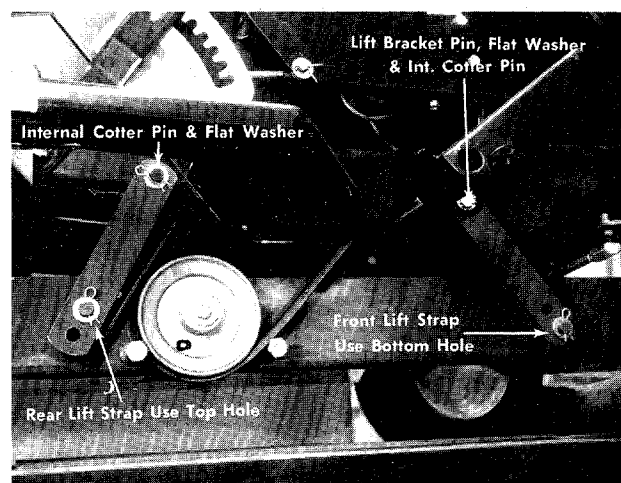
ASSEMBLY OF BELT TRAP
